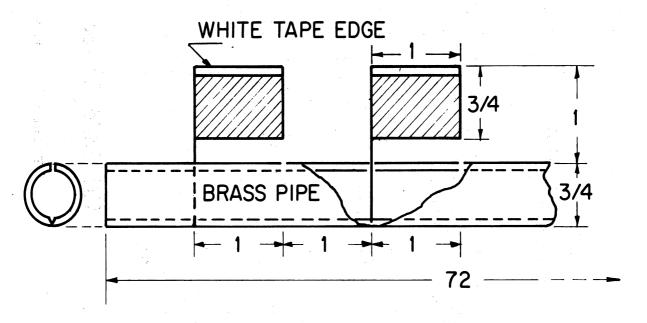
Flag arrangement on bar. (Dimensions are in inches.)
